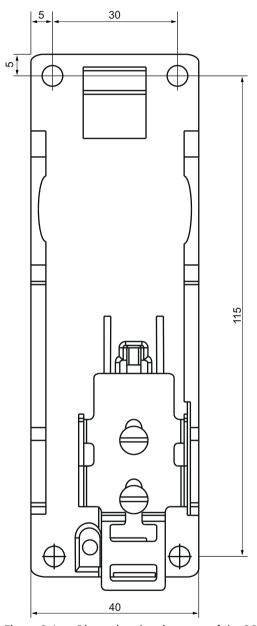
Dimension drawing, rear of the SCALANCE X-000
